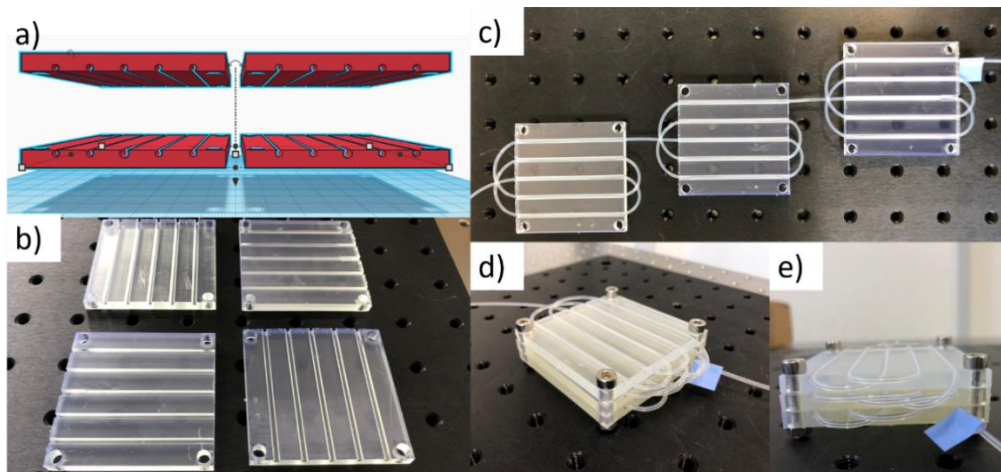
Structure of Coil 1 fabricated by 3D printer. Structure a) designed with online software ThinkCAD; b) printed out four layers; c) 3 layers with insert tubing; d) and e) 3 layers fixed with screws.
